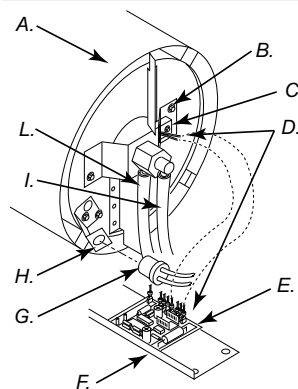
Fuel Filter Removal, 100,000 Btu/Hr.
